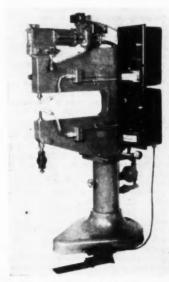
Northrop's construction-heated coin dimple machine. (Photo courtesy of Zephyr Mfg. Co.)
